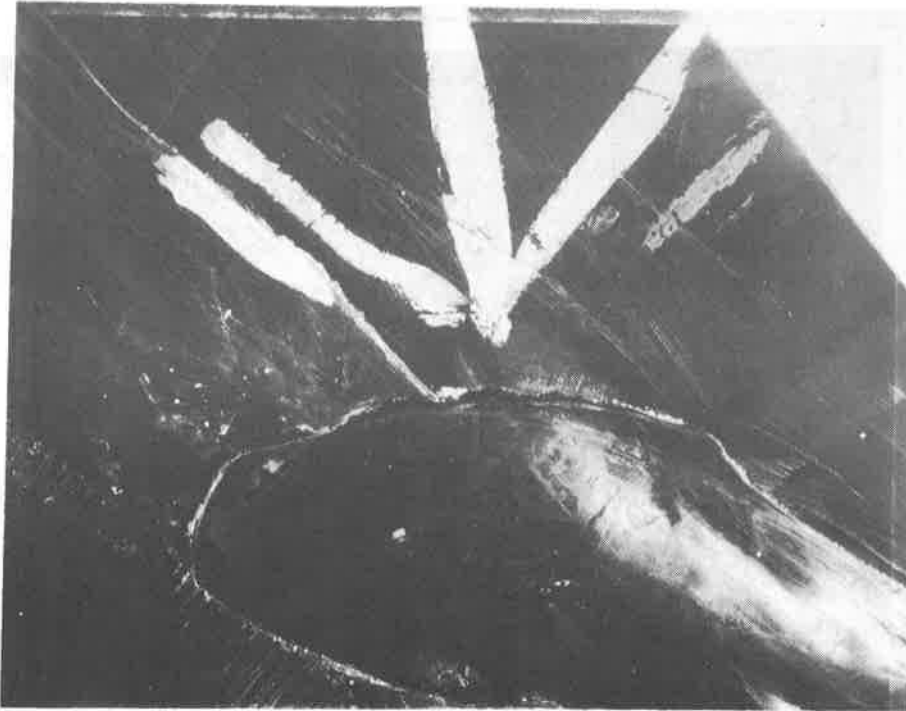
VIEW OF 0.04-INCH DIAMETER LEAK AT END OF EXTRUSION WELD ON 80-MIL HDPE LINER
